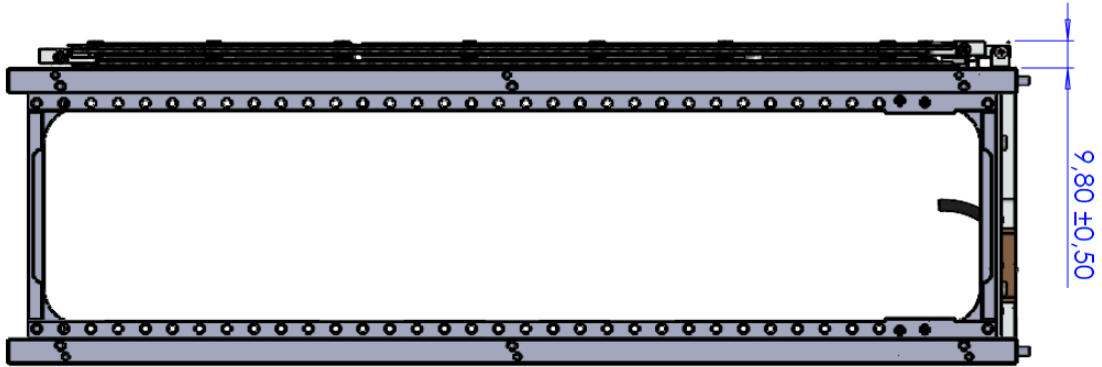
Stowed - side view. Protrusion rail shown. The mounting surface is 1mm indented into the cubesat.
